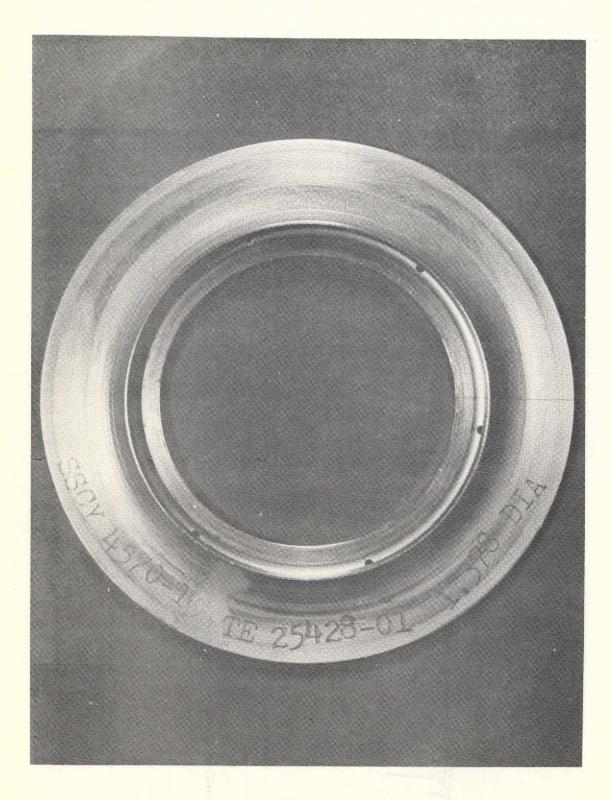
Cracked Oil Dam and Heat Shield, Oil Side.
